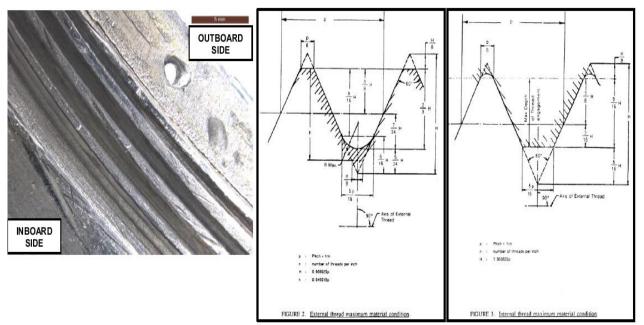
Detail of the overall intact support bearing sleeve assembly thread, which maintained the trapezoidal profile required by the drawing and excerpt of MIL-S-8879 specification which it refers to.
